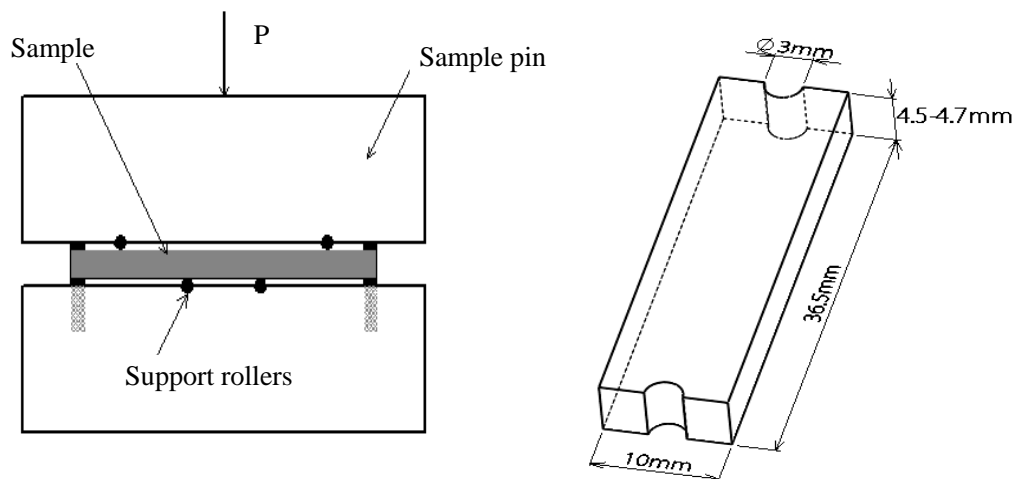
The setup of four-point bend testing and, and the geometry and dimensions of a four-point bend sample.
